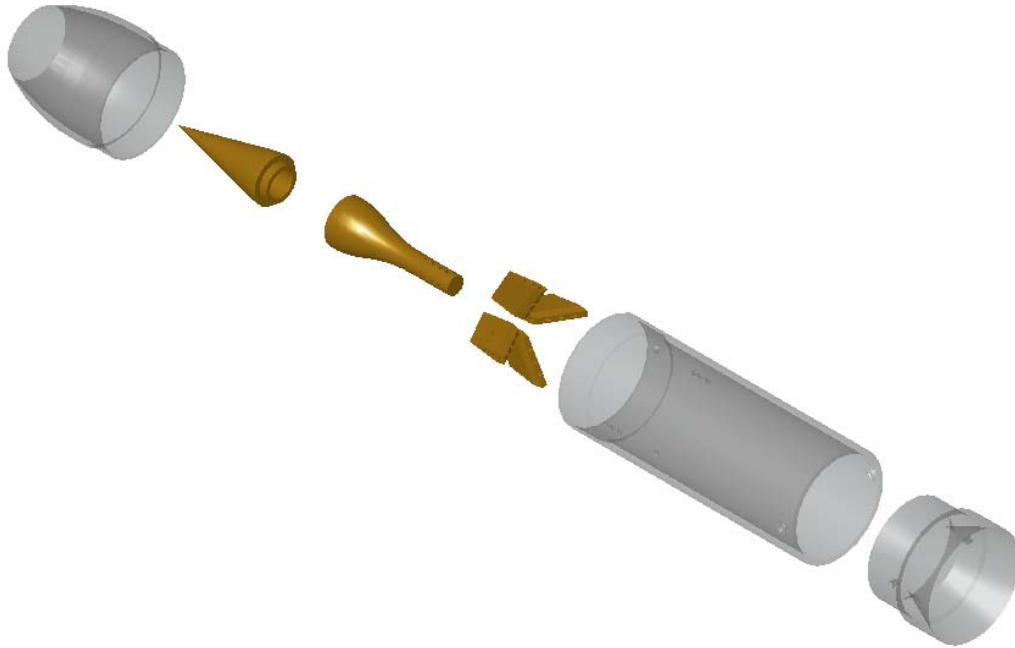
Exploded view of all parts of the ramjet. From left to right: intake, cone, cone rear, struts (4), combustion tube, and nozzle.
